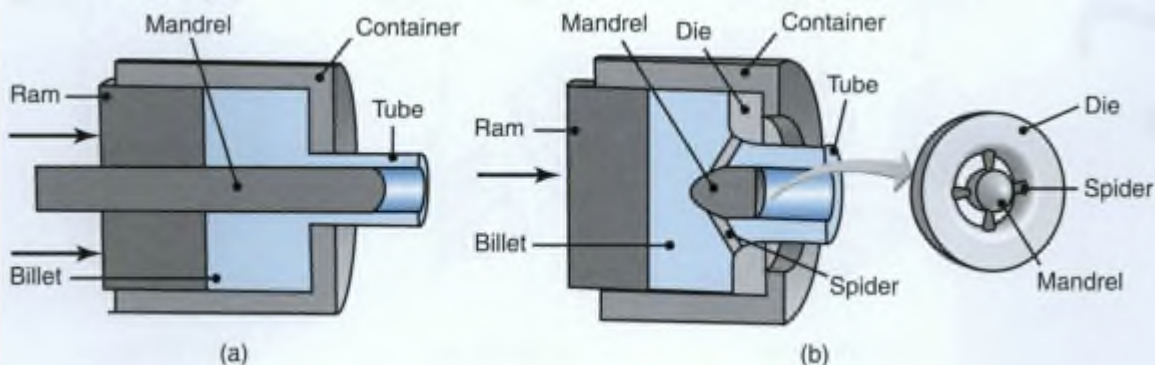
Extrusion of a seamless tube (a) using an internal mandrel that moves independently of the ram; an alternative arrangement has the mandrel integral with the ram and (b) using a spider die (see Fig. 15.9) to produce seamless tubing.
